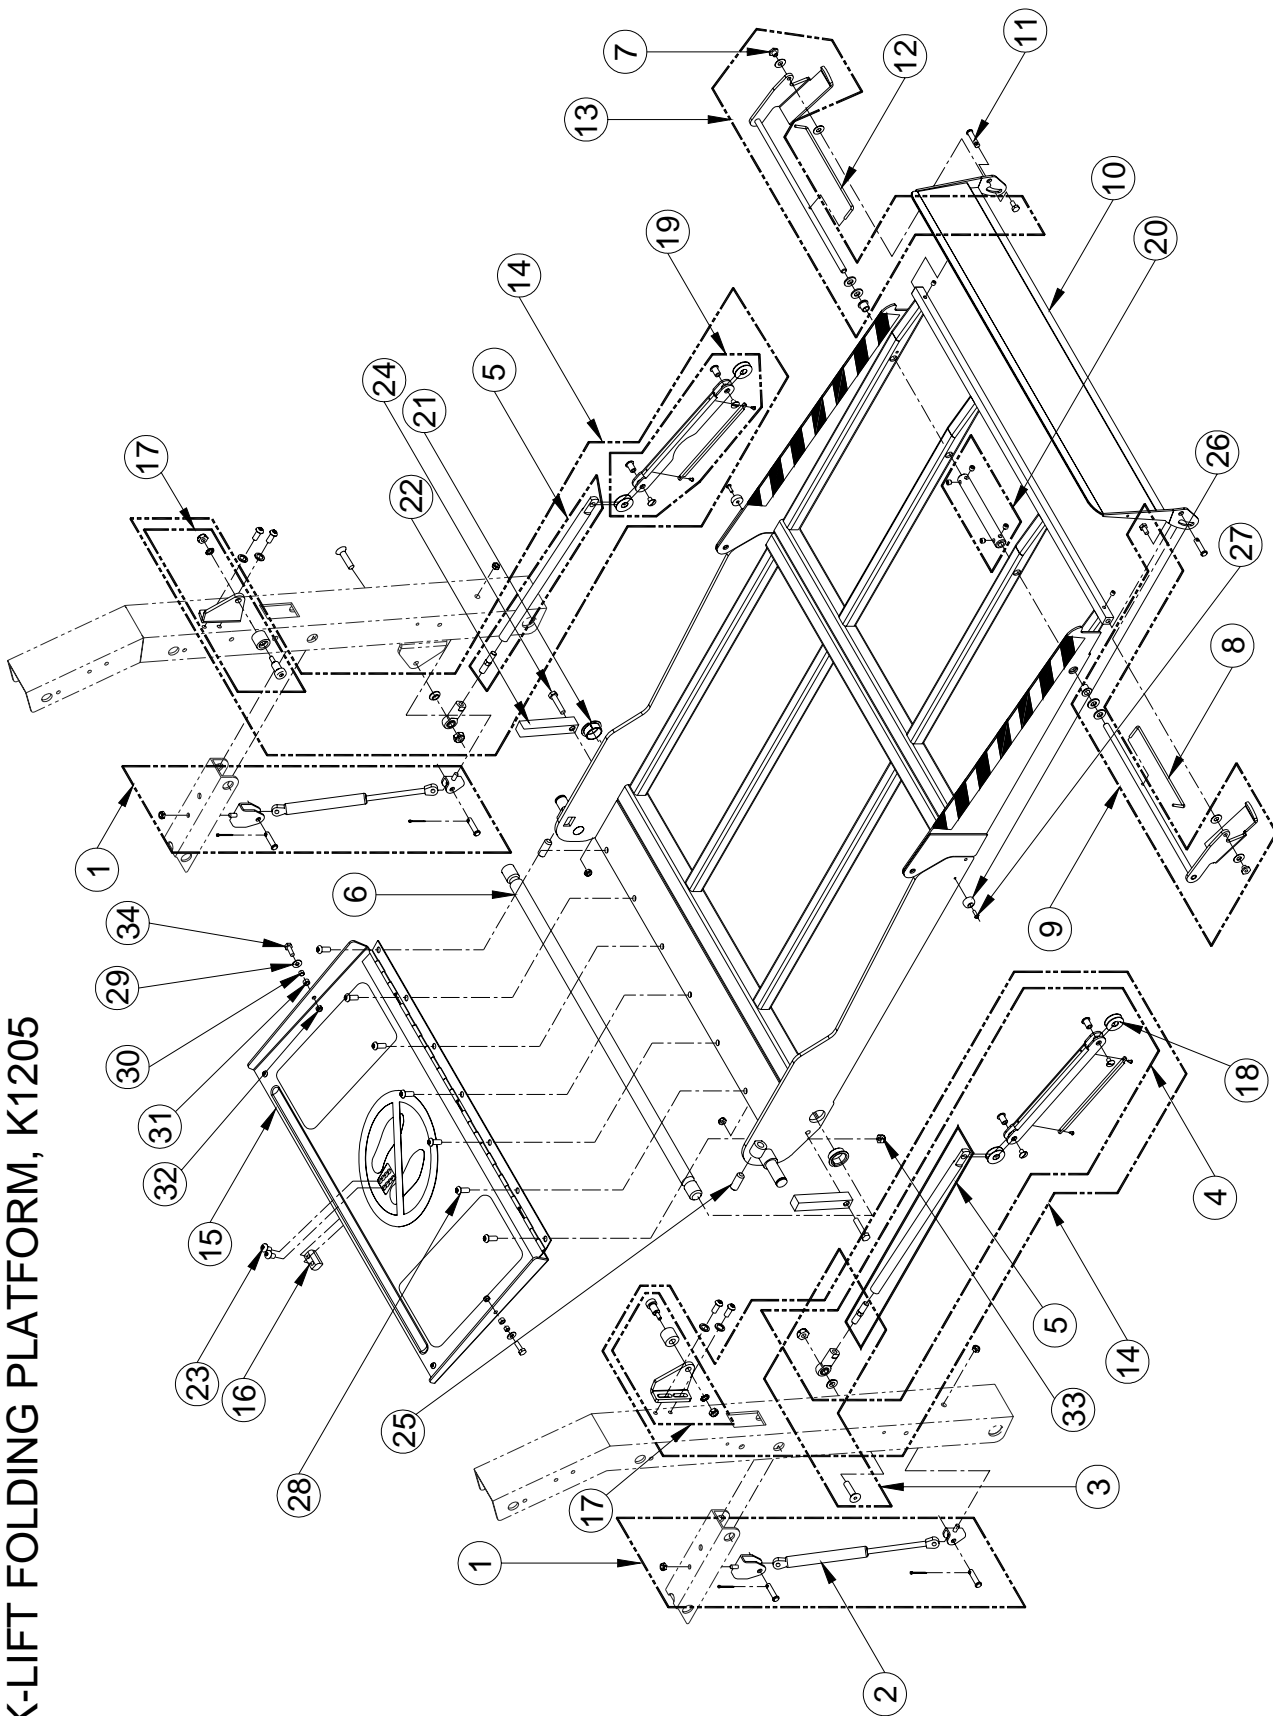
FOLDING PLATFORM ASSEMBLY, K1205
